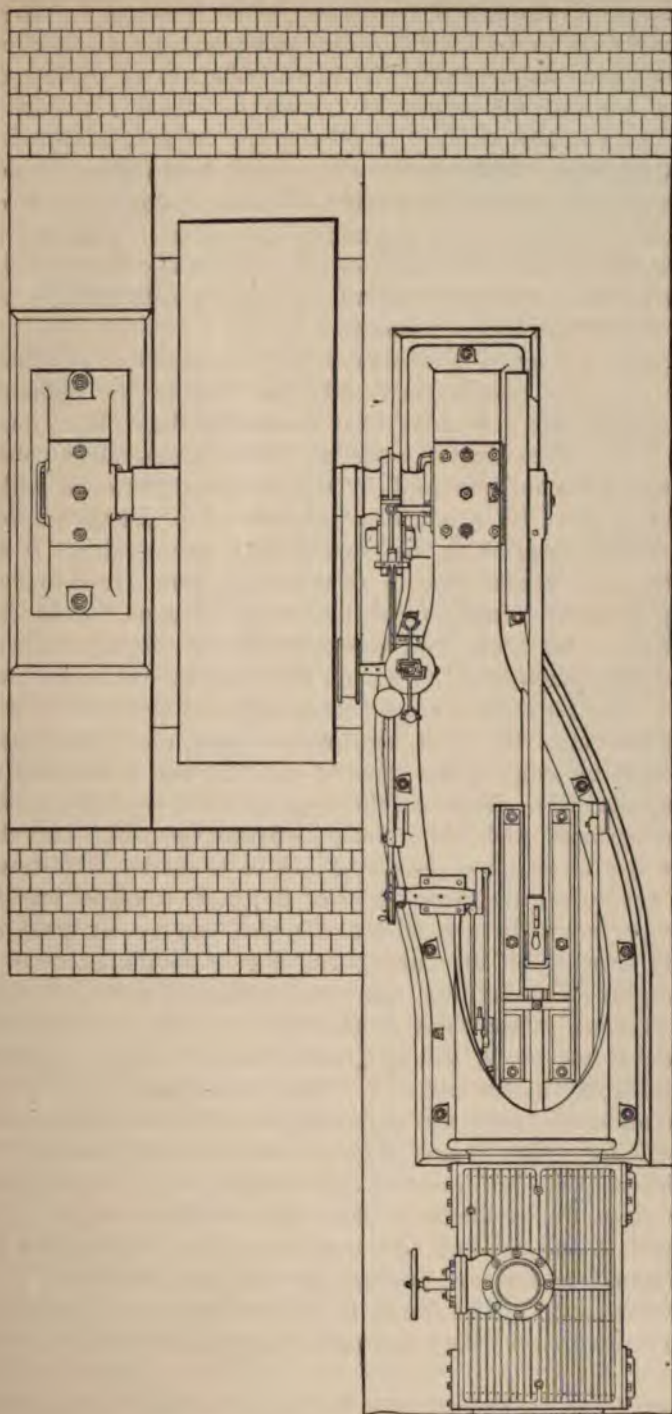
The Porter-Allen Horizontal Steam Engine. Plan.
